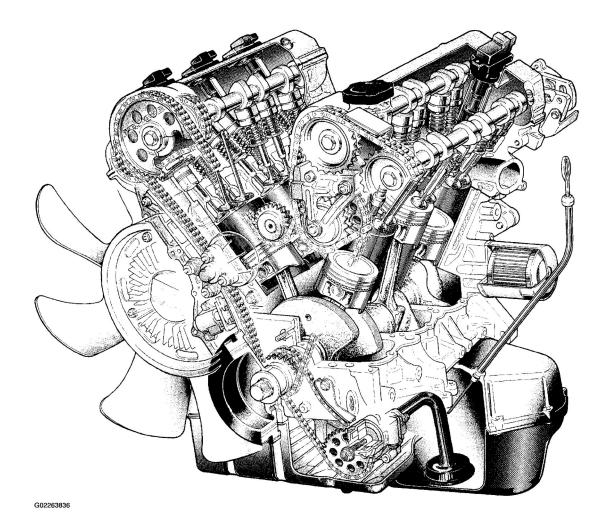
Cutaway View Of Engine Courtesy of SUZUKI OF AMERICA CORP.
